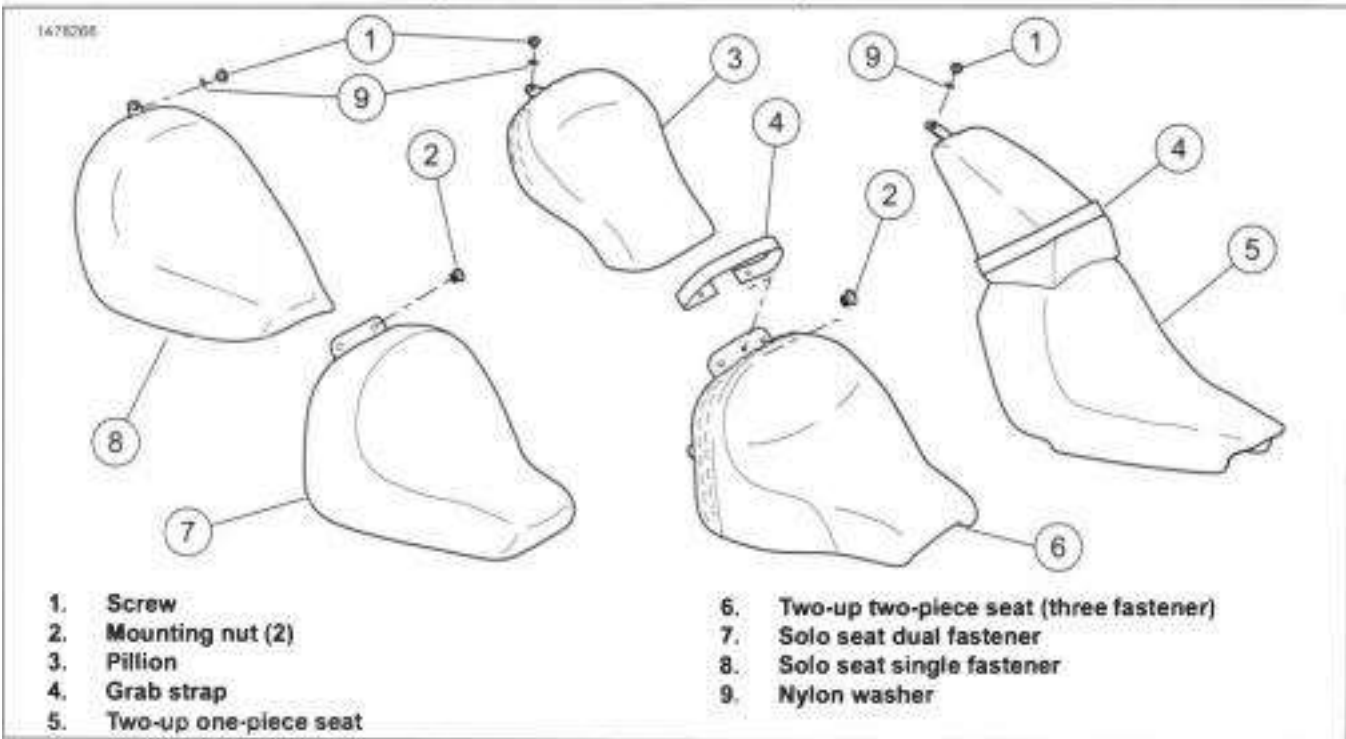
Two-up Two-piece Seat (Two fastener)
